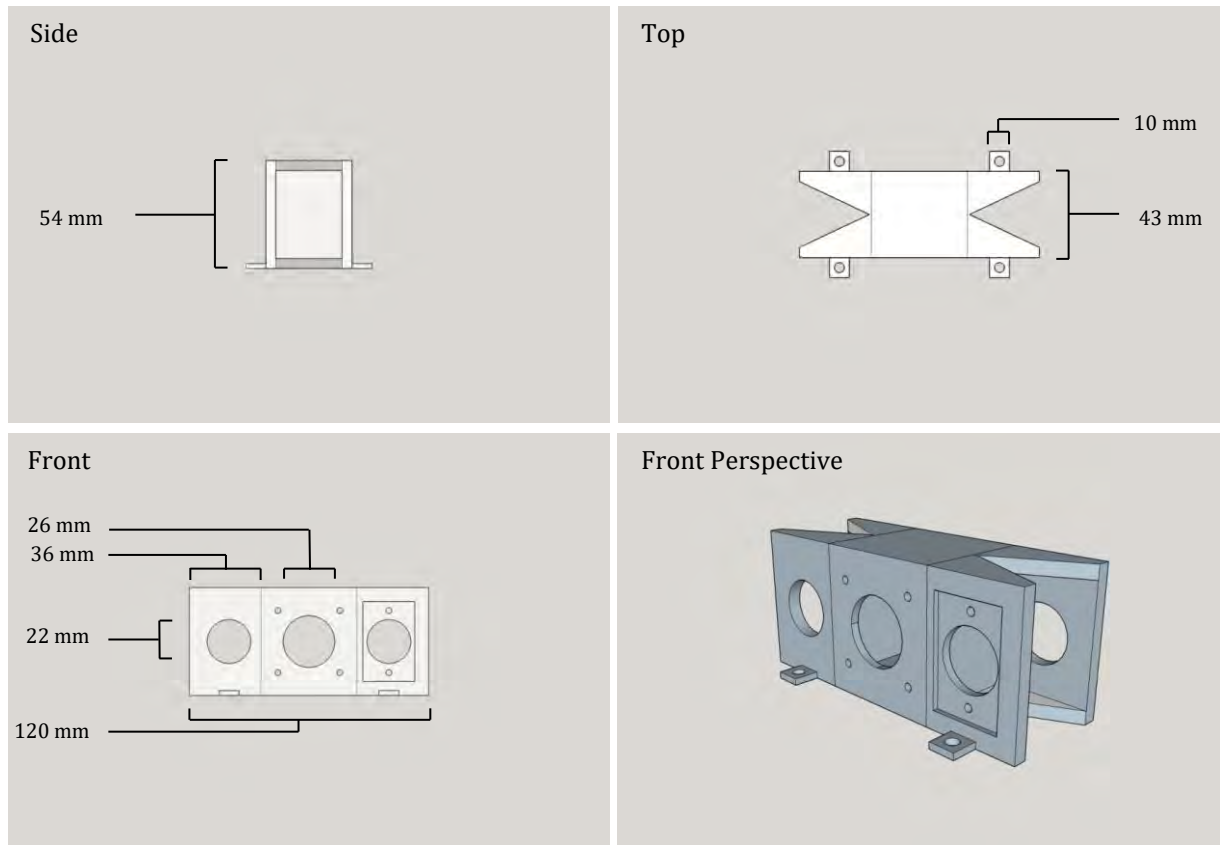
CAD model of the 3D printed central motor and syringe mount of the completed motorized media pumping system.
